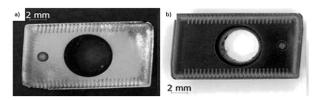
Cutting inserts used in the study; a) worn; b) new
